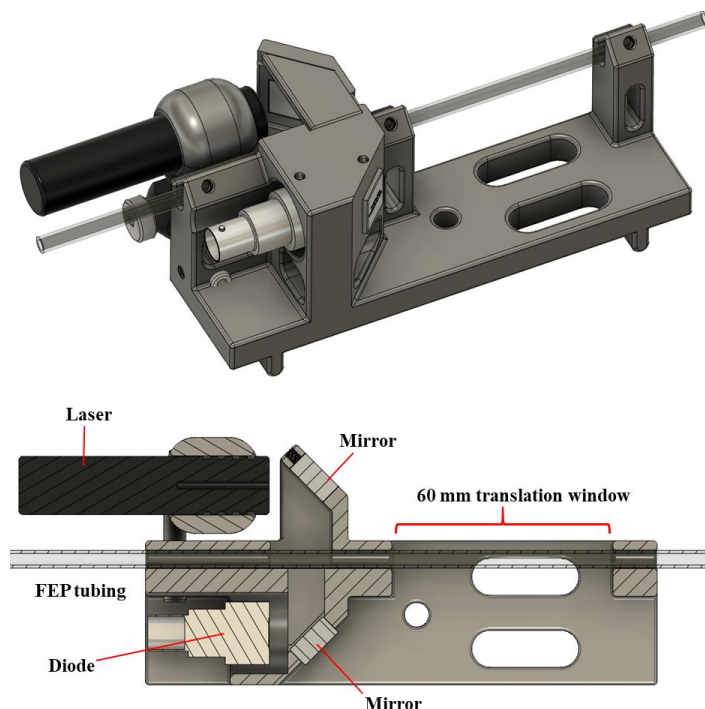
CAD drawings of updated slug triggering mechanism design, above (top) and side (bottom) view.
